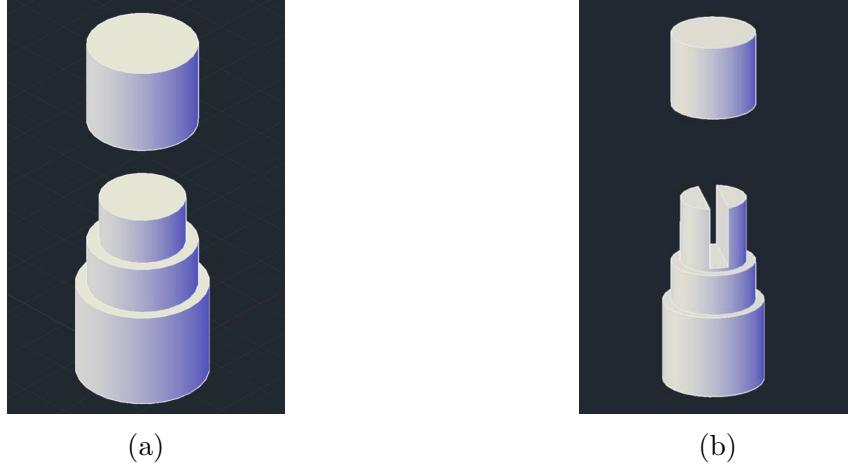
CAD models of custom 3D printed sample stages designed for the MPMS. (a) Standard 3D-printed sample stage designed for air-free sample handling and integration with experimental setups. (b) Modified vertical stage, allowing for alternative mounting orientations while maintaining an inert environment. Both designs were developed for compatibility with the Air-Tight Module (ATM), enabling seamless transfer between preparation and measurement environments without air exposure.
